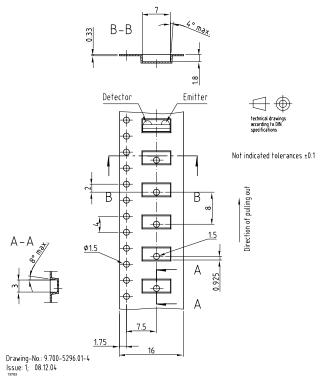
Tape for 1.6 - mm Package Side View Oriented
